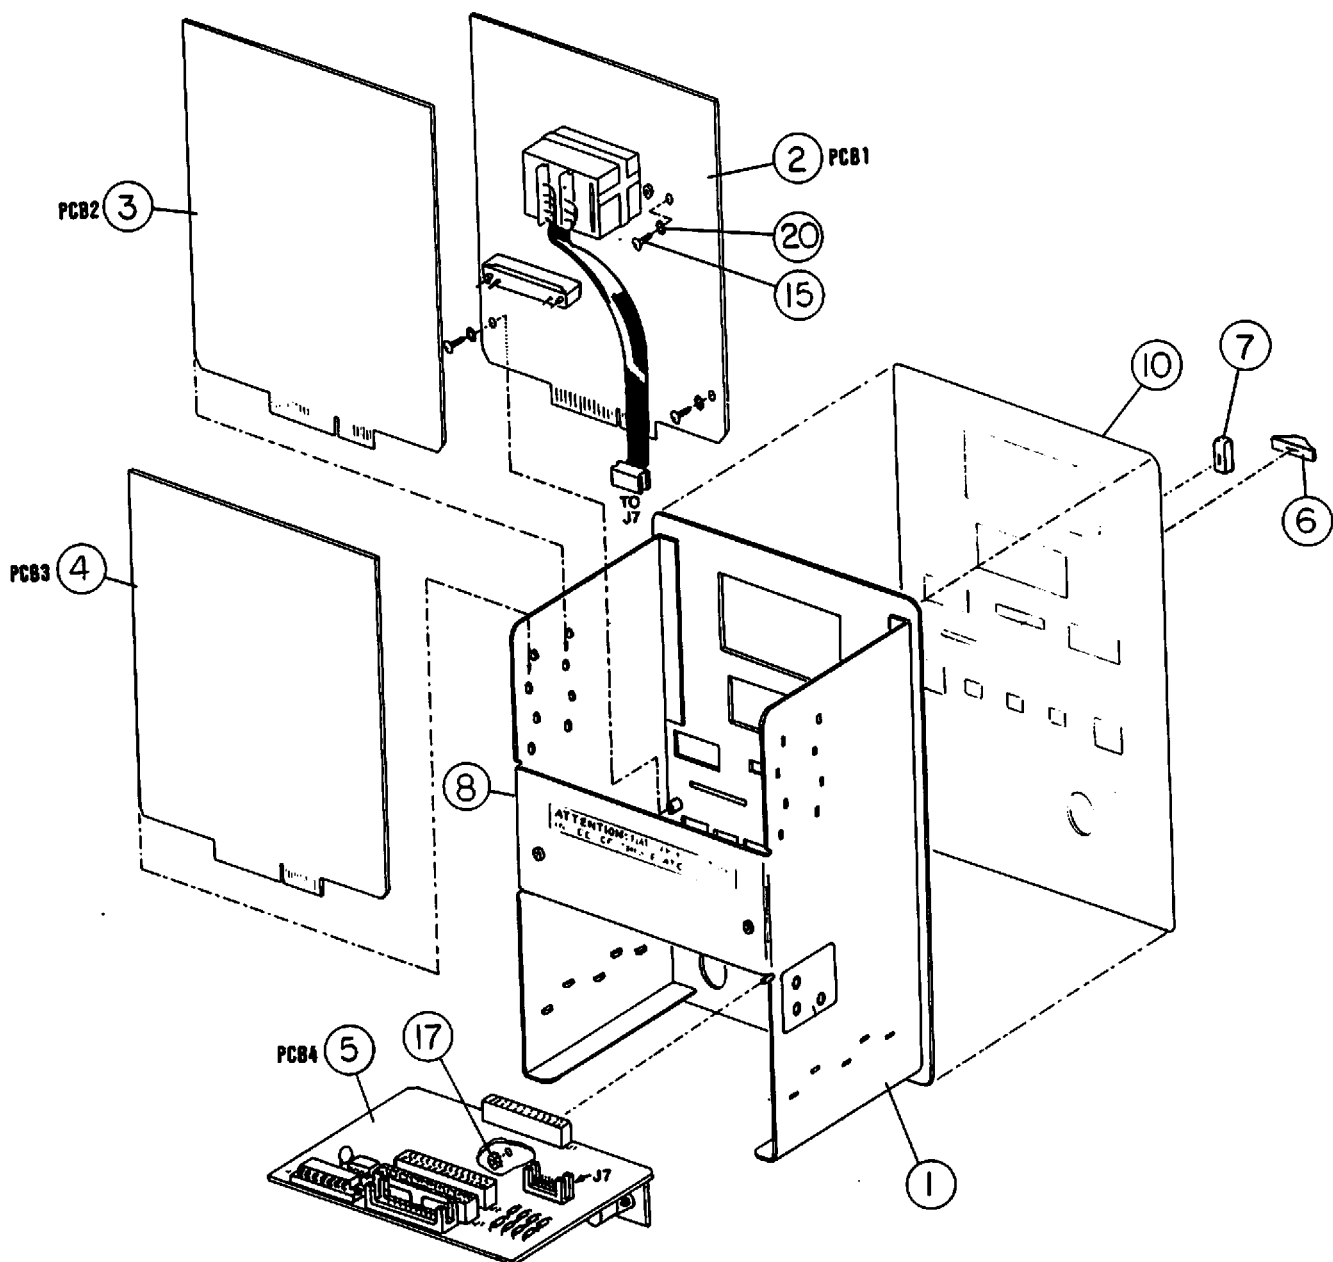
CONTROLLER ASSEMBLY, PARTS LOCATION DIAGRAM
